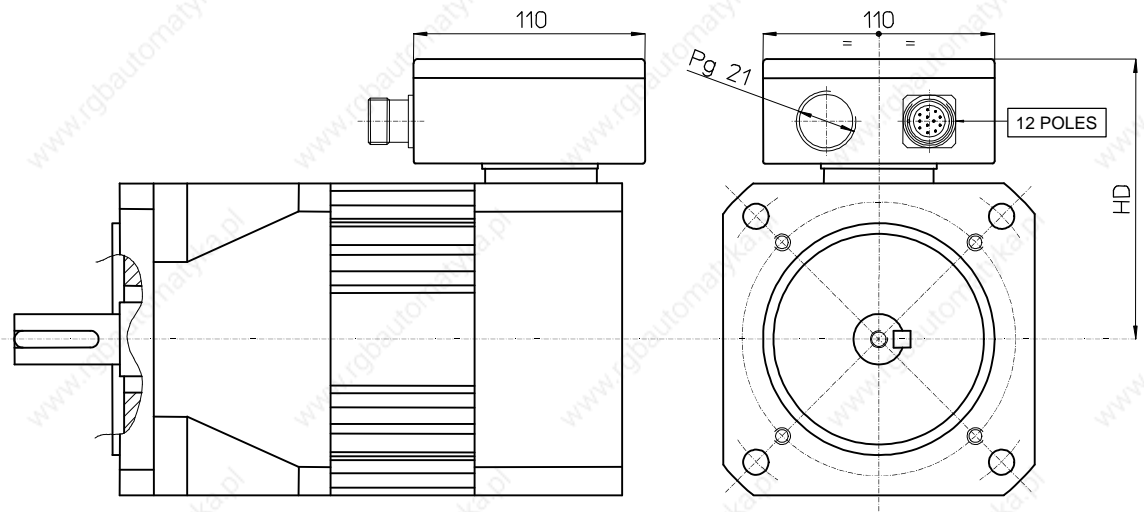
Overall dimension drawings of 8C Series servomotors with connection box (only for 8C4 and 8C5)
